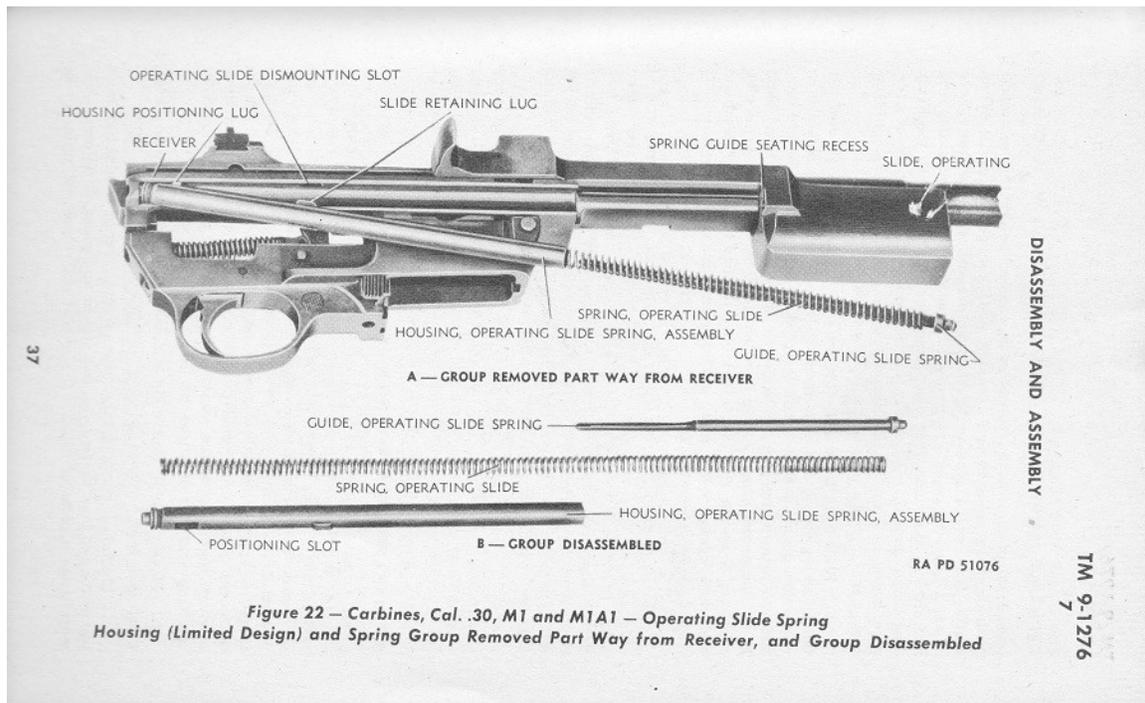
Carbine, Cal. .30, M1 and M1A1 — Operating Slide Spring Housing (Limited Design) and Spring Group Removed Part Way from Receiver, and Group Disassembled
